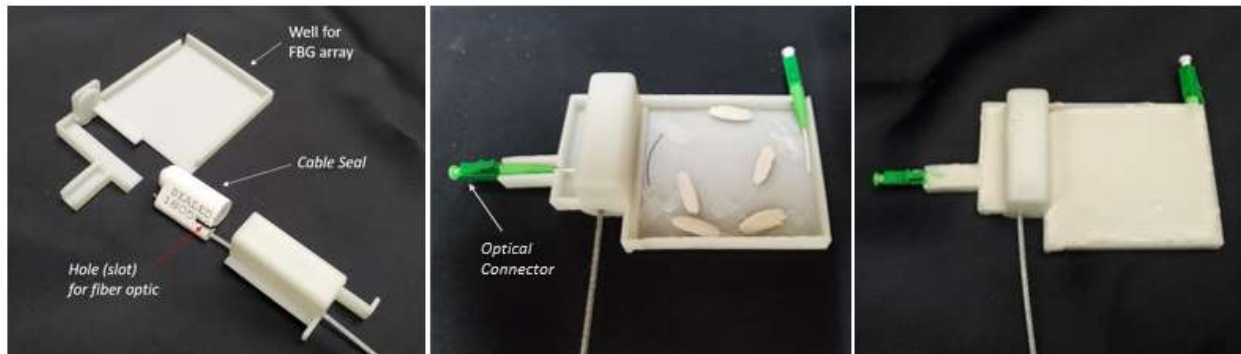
UID assembly. Left, the mechanical components of the UID. Center, the mechanical components assembled with the FBG (pre-potted, see text) array distributed in the well for final potting. Right, The completed assembly.
